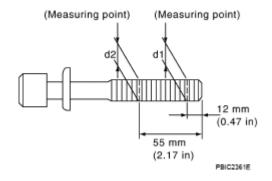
Identifying Cylinder Head Bolts Outer Diameter Courtesy of NISSAN MOTOR CO., U.S.A.
